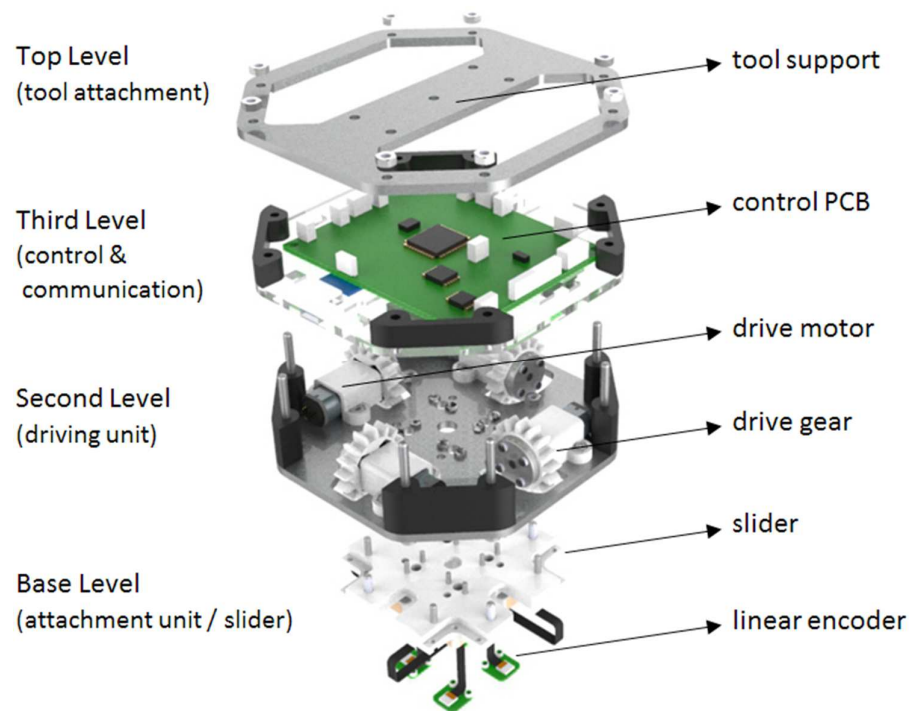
Exploded view of the third SCALA prototype agent, showing its components.
